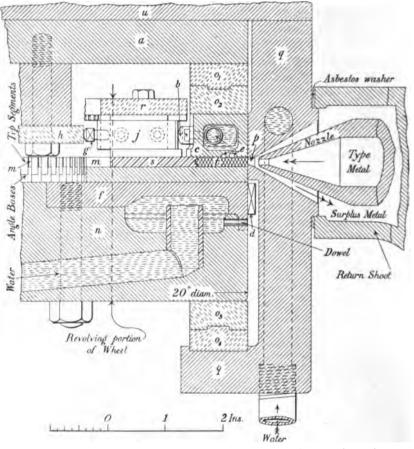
Wicks rotary typecaster; section through mould at casting point.
